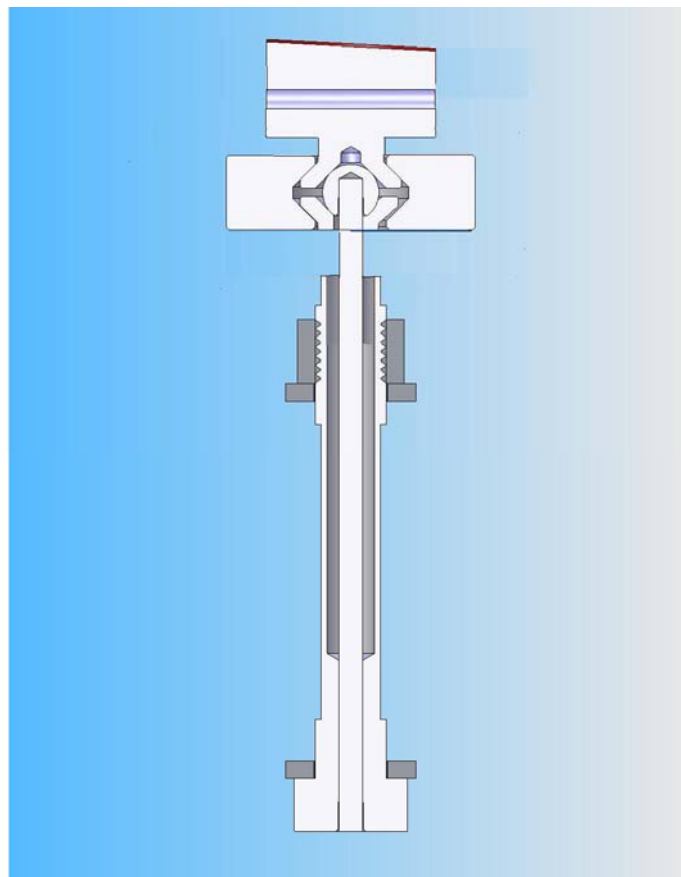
side section view of Noodle Flexure Assembly, fully assembled
